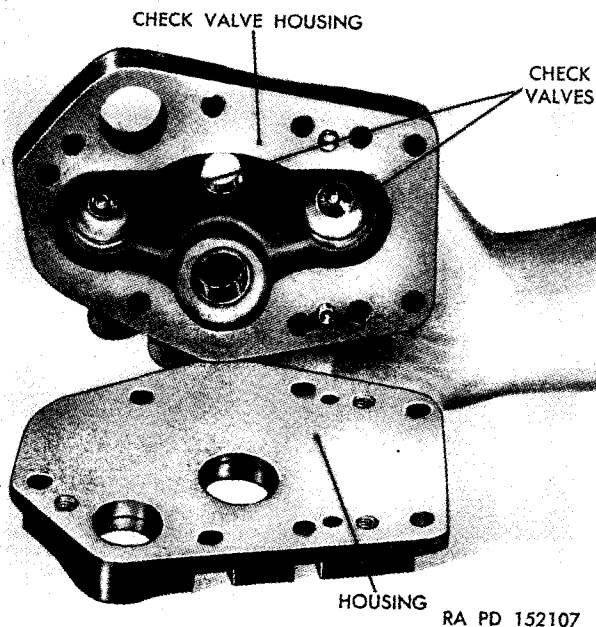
Installing output-brake and pressure-pump check-valve housing.
